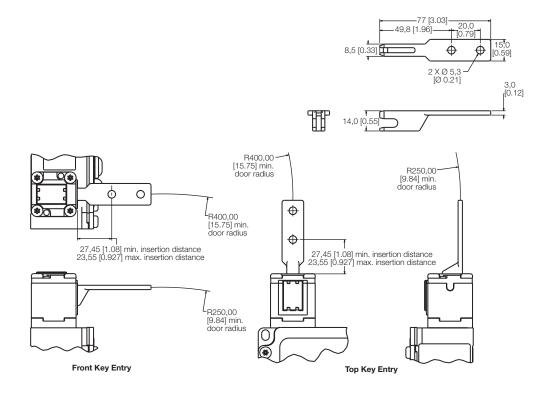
GKL/R Key Code 7 Dimensions mm [in]
